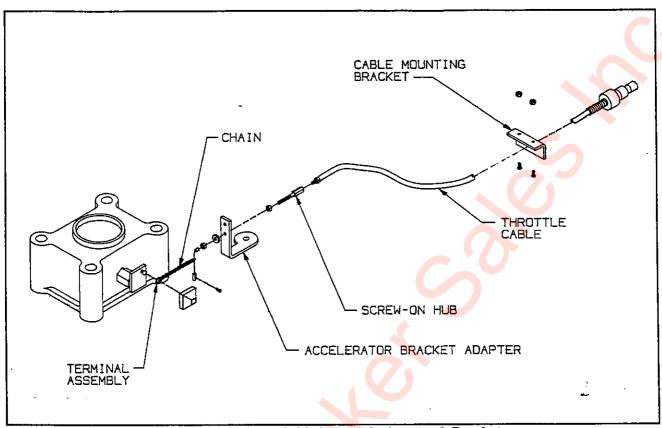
Chevy Cable Inst. to Carburetor & Bracket
